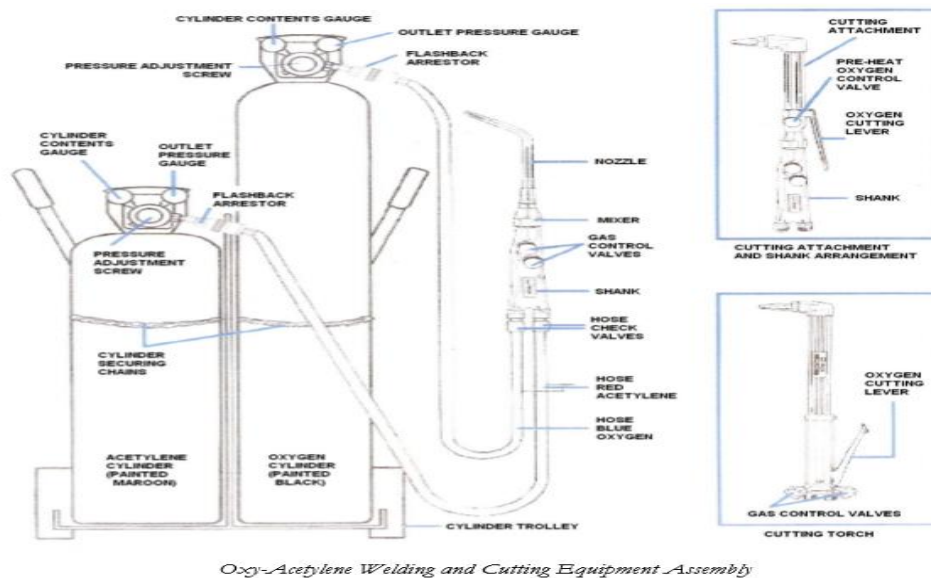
1 Oxy-Acetylene Welding equipment assembly
